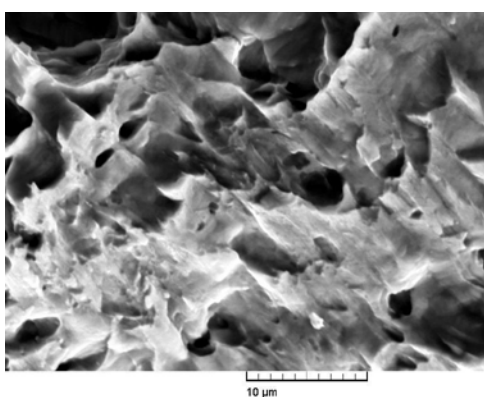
SEM FRACTOGRAPH FOR TUBE 2
